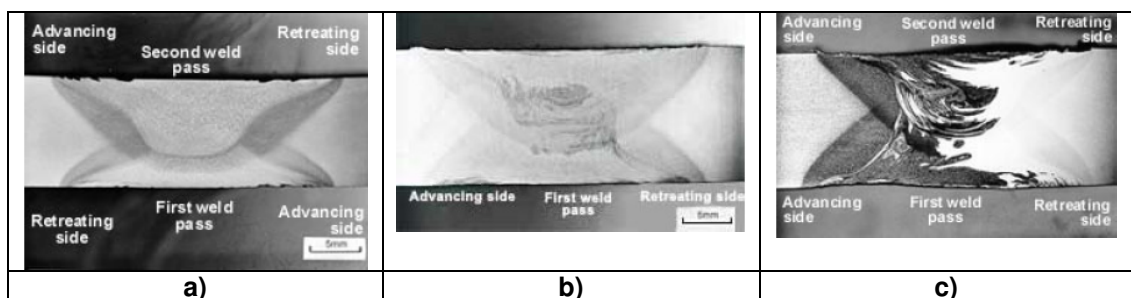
Macrosections of double sided FS welded a) 12%Cr steel, b) low C steel, c) dissimilar 12% Cr and low C steel weld (Thomas et al 1999).
